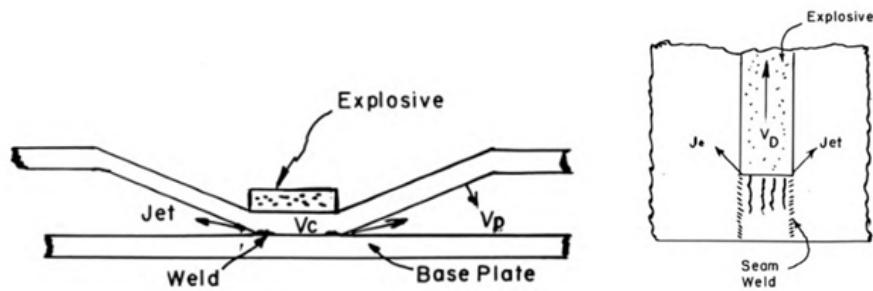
Schematic sketch of parallel plate configuration for NASA-LaRC explosion seam welding[5].
